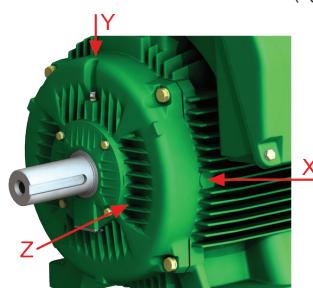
Flat surfaces for vibration checking on the DE side (frames 225 to 355)
